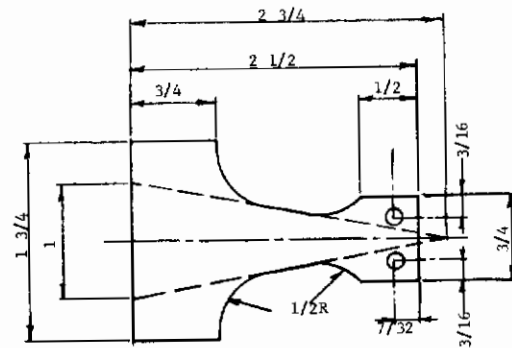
KROUSE-TYPE FATIGUE SPECIMEN
